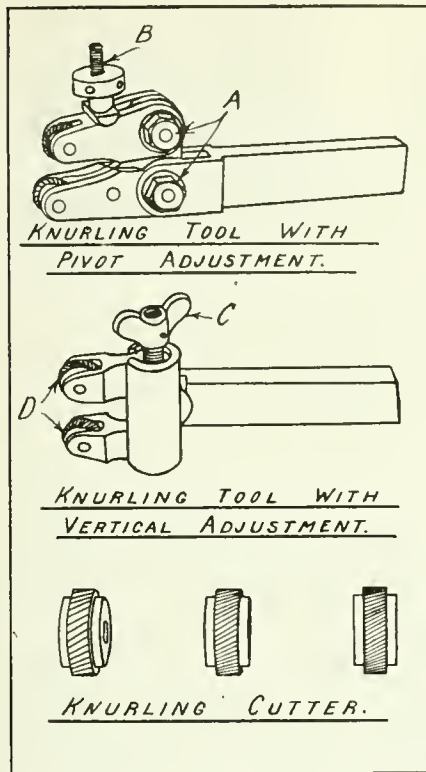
TWO LATHE TOOLS USED FOR KNURLING.
